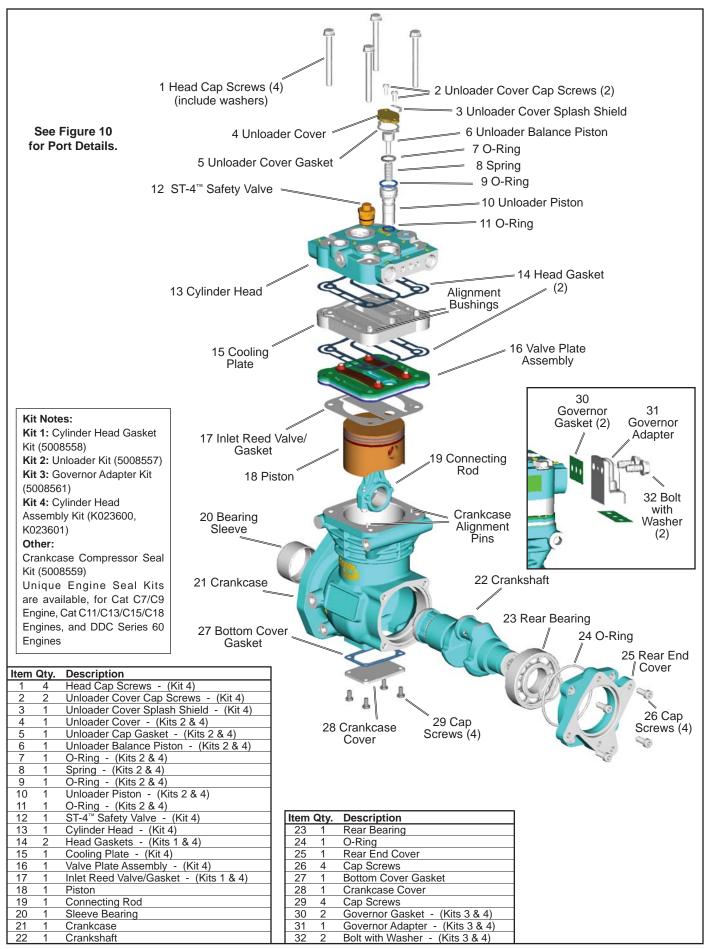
BA-921® STANDARD COMPRESSOR EXPLODED VIEW
